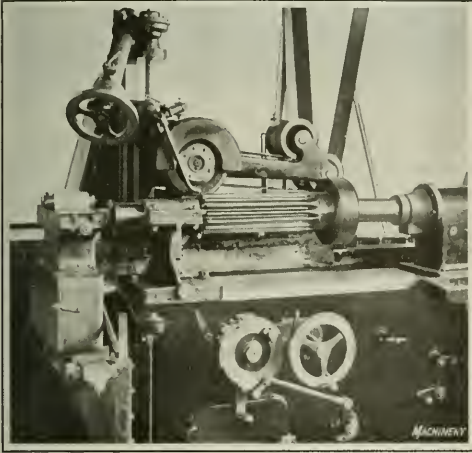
Gear-tooth Grinding Machine of the Formed-wheel Type
